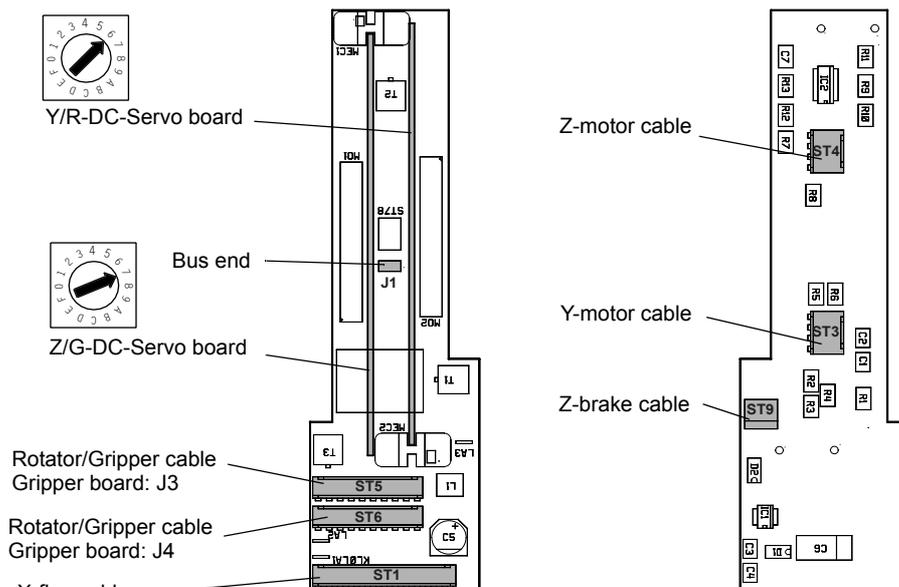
RoMa 2 backplane connections (component side: left, solder side: right)
